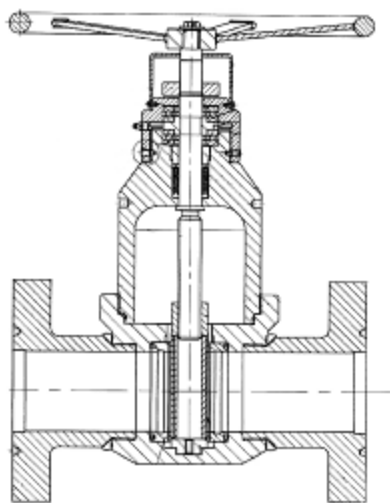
General view of a double-disc valve designs by N. M. Kalmykov [18]
